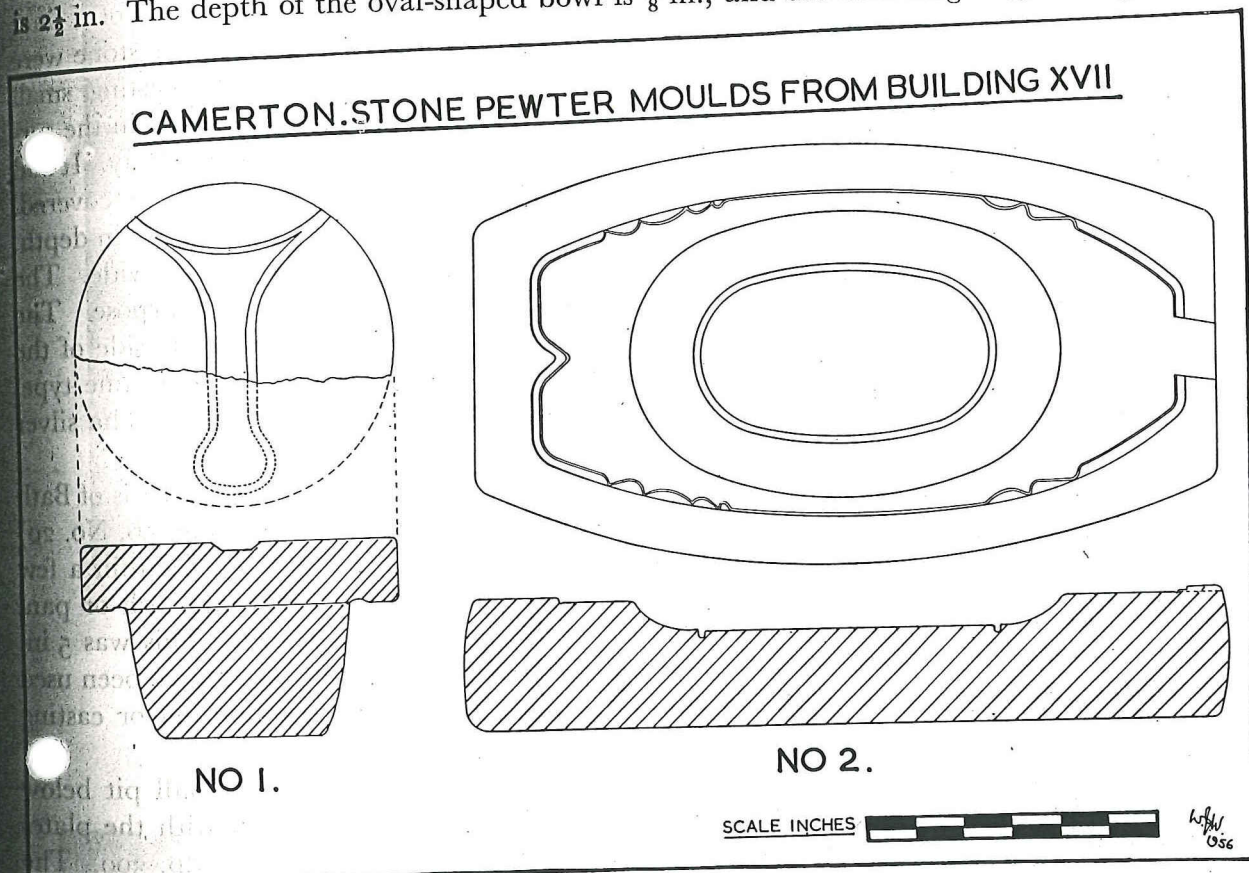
Stone pewter moulds. 1. Skillet with handle. 2. Oval-shaped dish.
